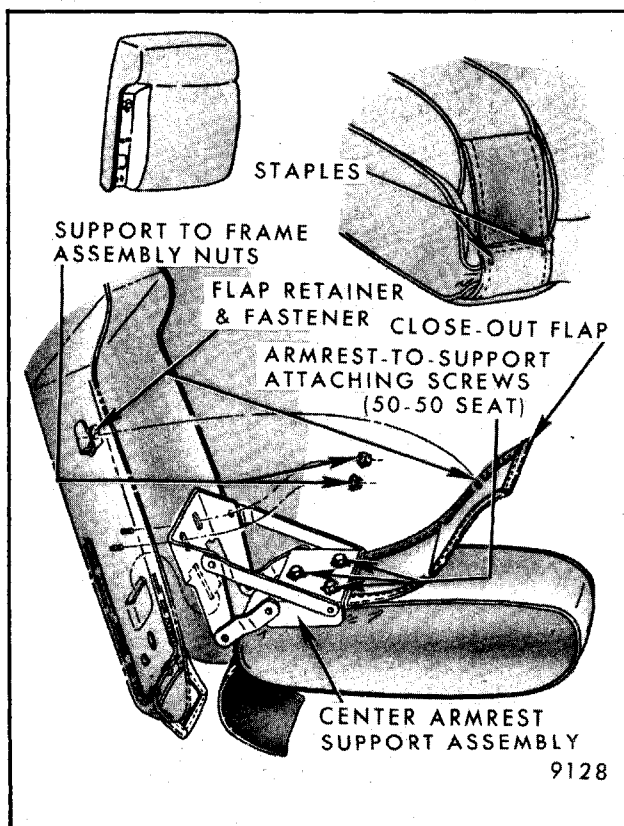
Front Seat Back Center Armrest - Cadillac "E" Styles 50-50 Driver's and Passenger's Seat
